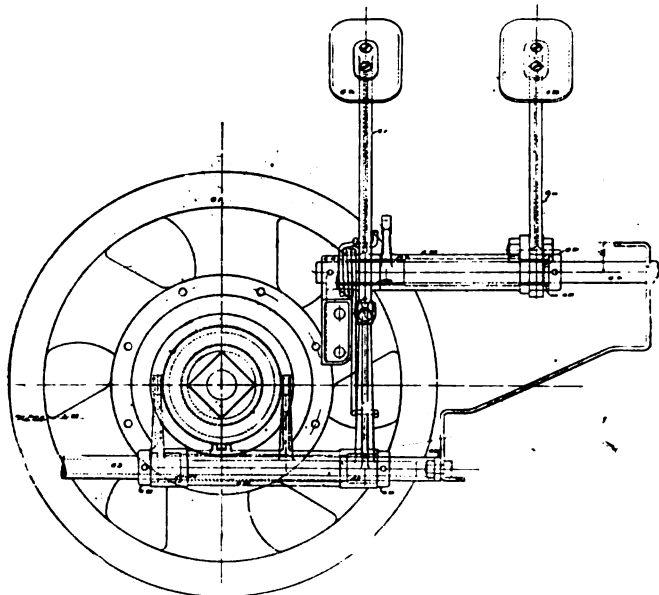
View showing arrangement of Clutch and Brake Pedals.
